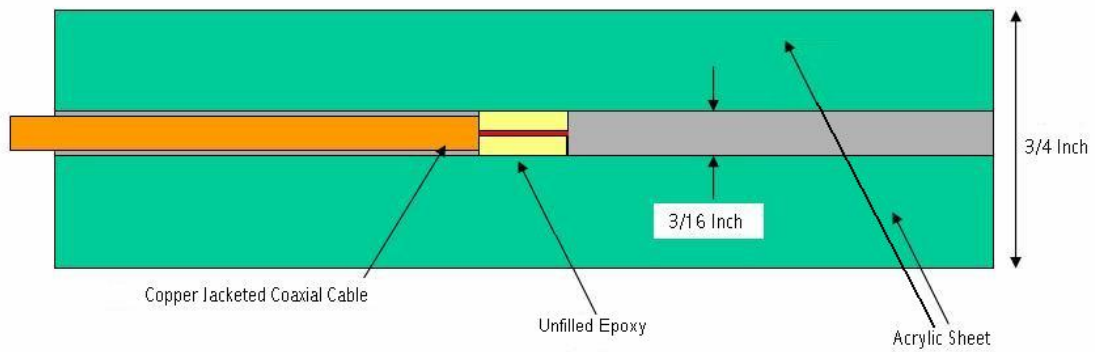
Completed Fragmented Slot Antenna Assembly
